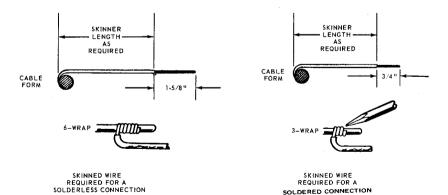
Skinned Lengths Required for Solderless and Soldered Wire Wraps.
